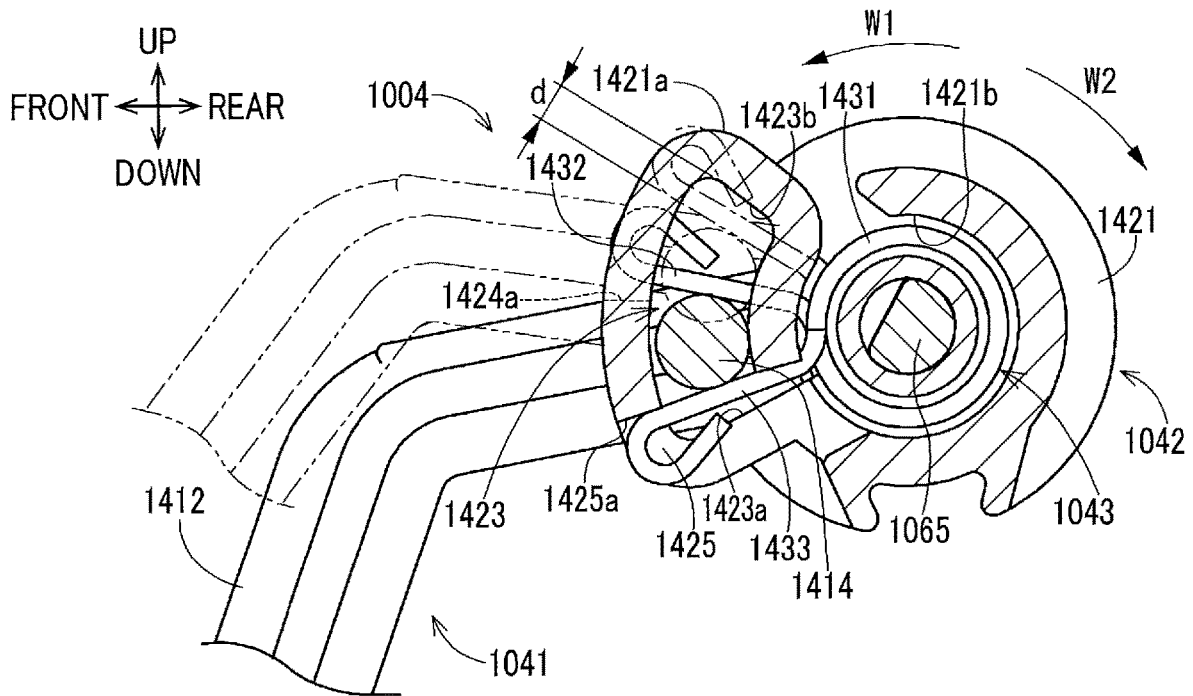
IMAGE-FORMING APPARATUS PROVIDED WITH MECHANISM FOR OPENING AND CLOSING SHUTTER OF FIXING DEVICE
